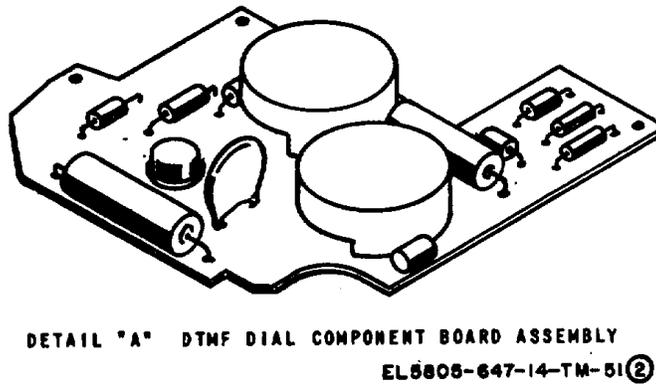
(2). 30 button key frame, component mounting, (sheet 2 of 2).
